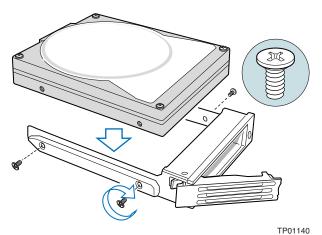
Installing Hot-swap Hard Drives into Drive Carrier
